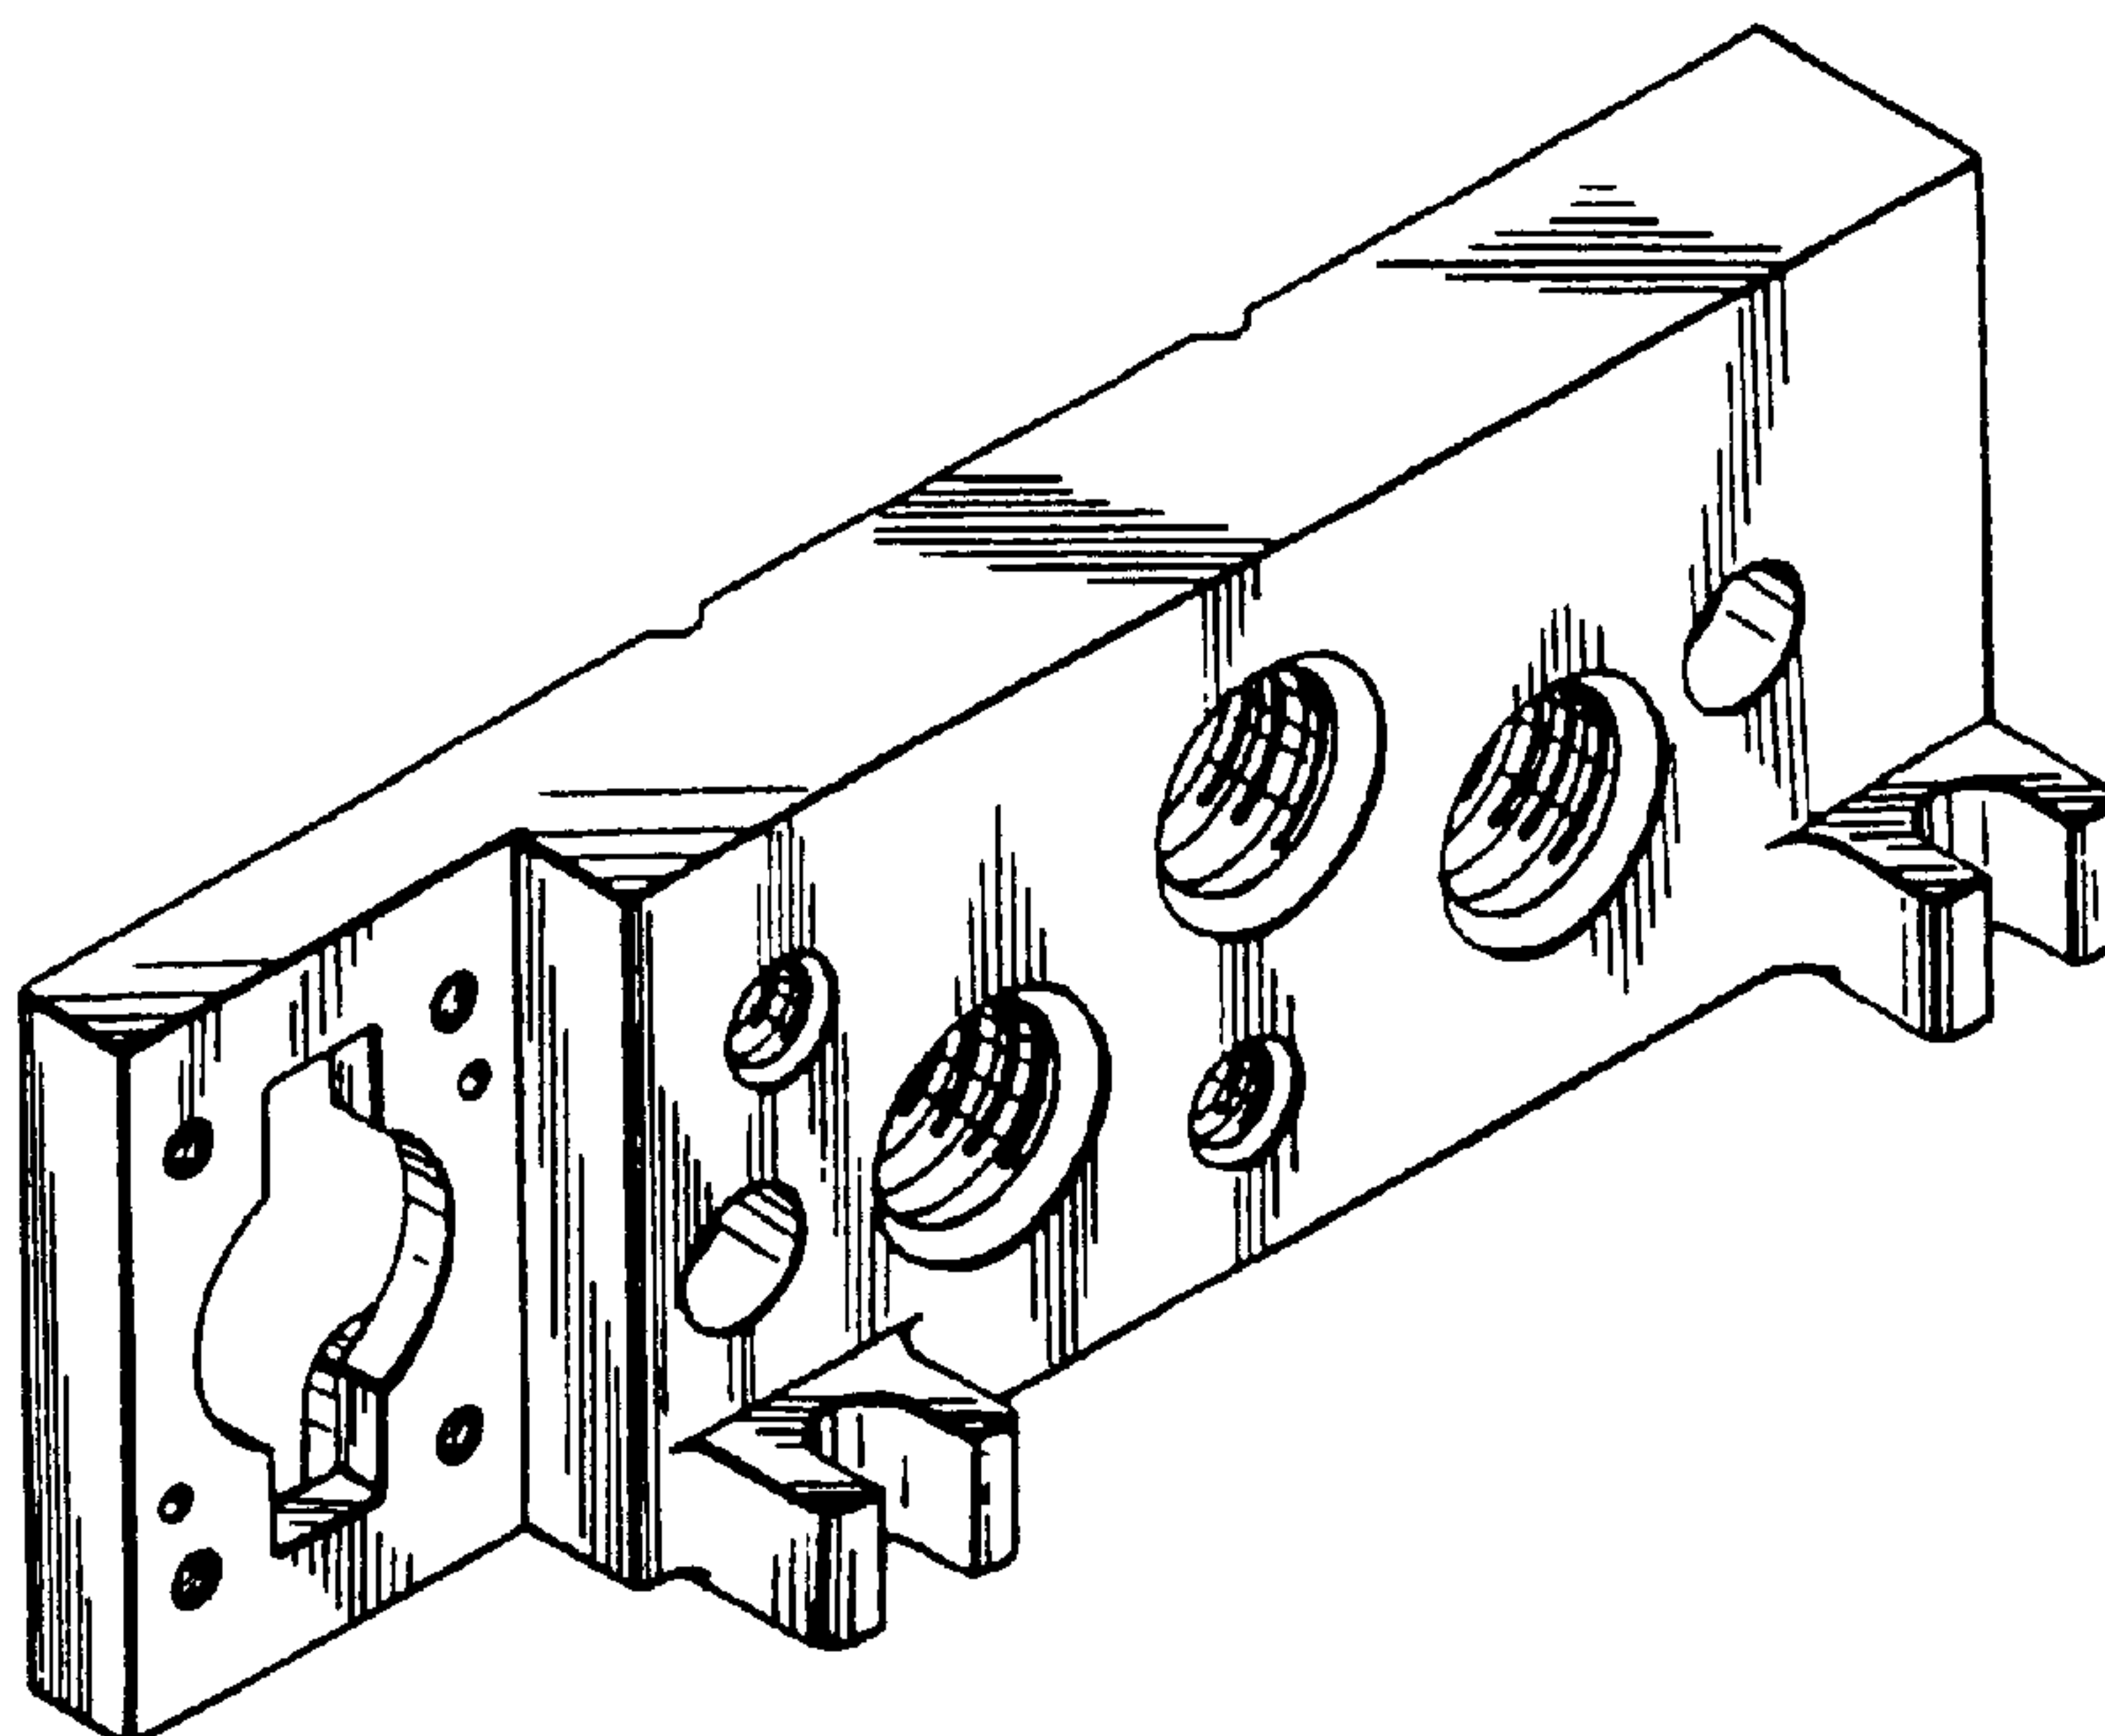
is a top, front and left side perspective view thereof when used with a manifold and manifold block;
